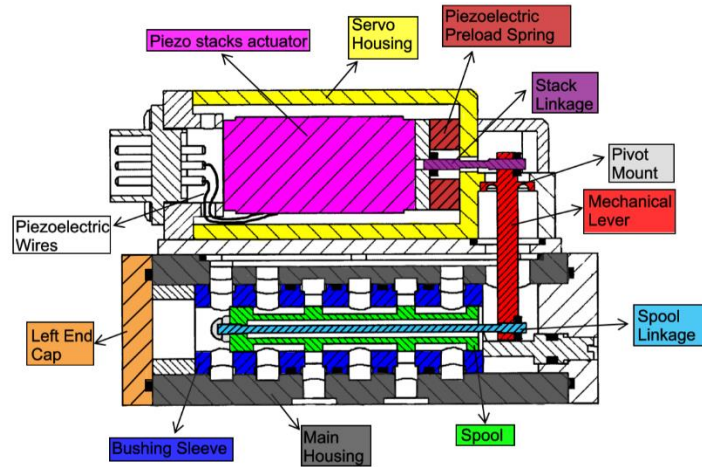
Redrawn cross section view of the direct drive piezo valve proposed in [88].
